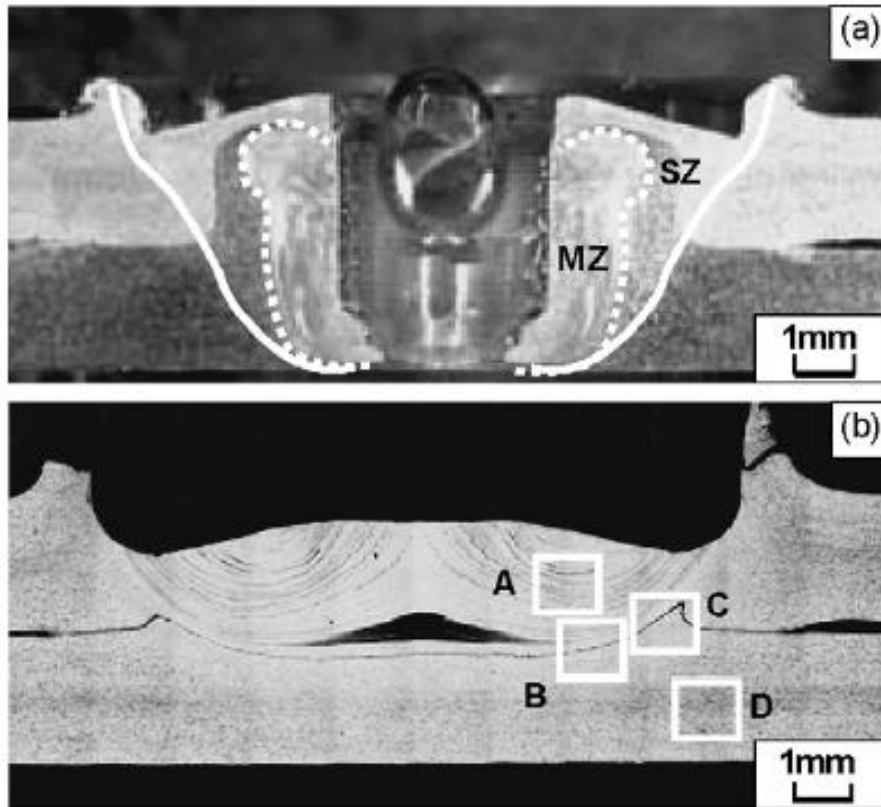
Weld structures of longitudinal section made by (a) probe tool (b) scroll tool
